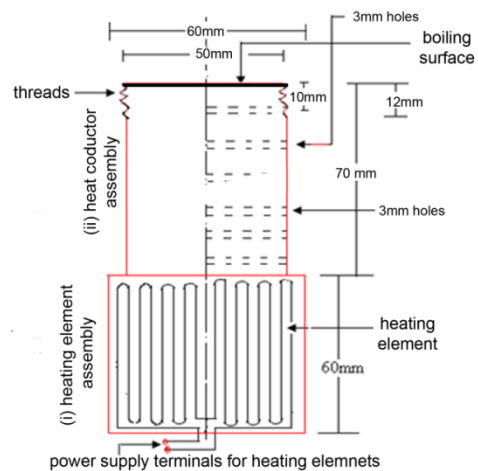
Heater assembly with its components. (i) Heating element assembly, (ii) heat conductor assembly and (iii) boiling surface.
